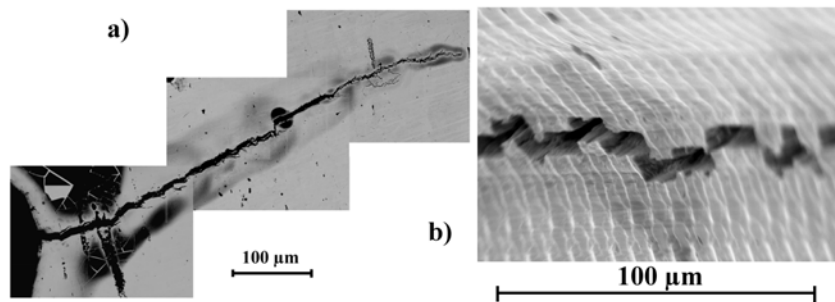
Artificial crack at the bottom of a thread: a) cross-section and b) crack opening on the surface of the thread bottom.
